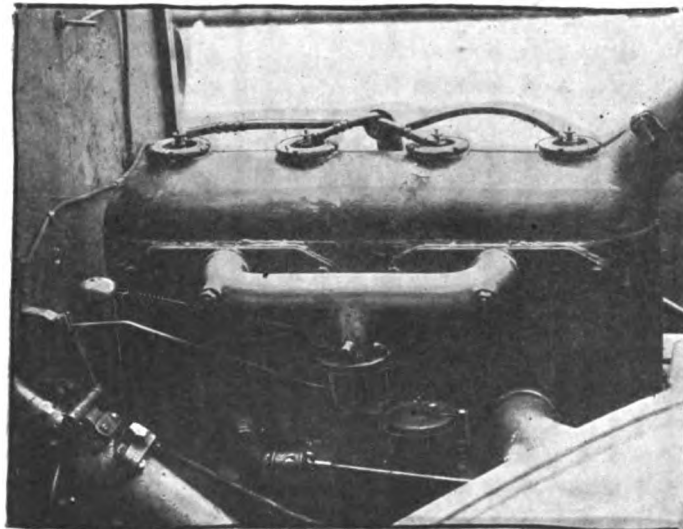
Intake side of the Swiss slide-valve engine with mounting of carbureter and T-shaped manifold
